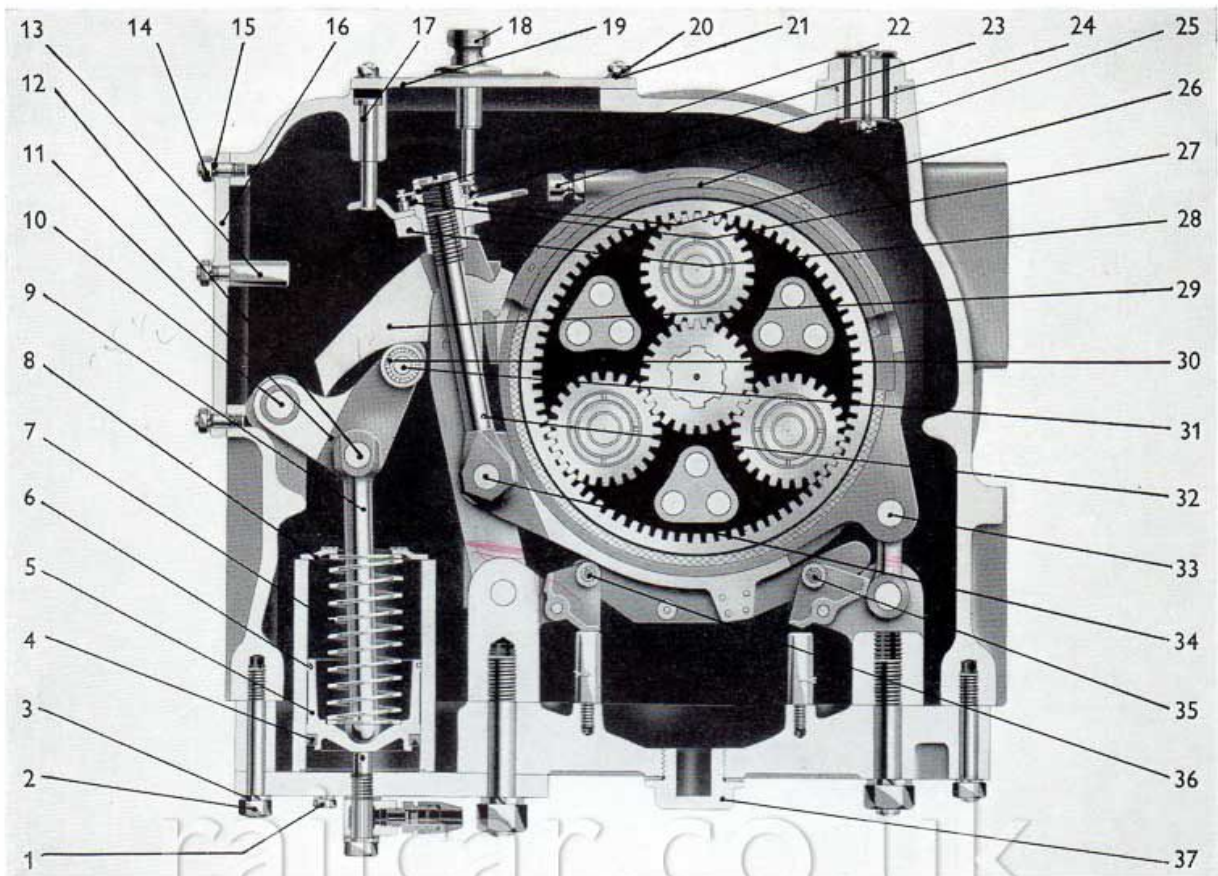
SECTION THROUGH THE 1ST SPEED BRAKE BAND (BRAKE OFF).
